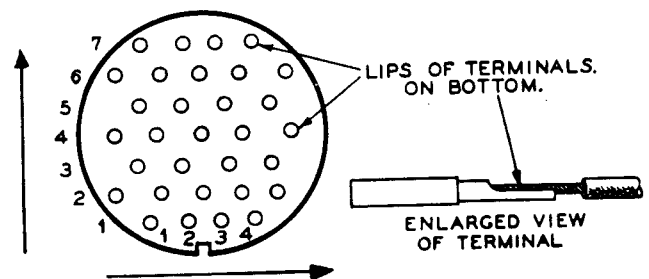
ORDER OF SOLDERING CONNECTIONS ON MULTI-PIN PLUG
